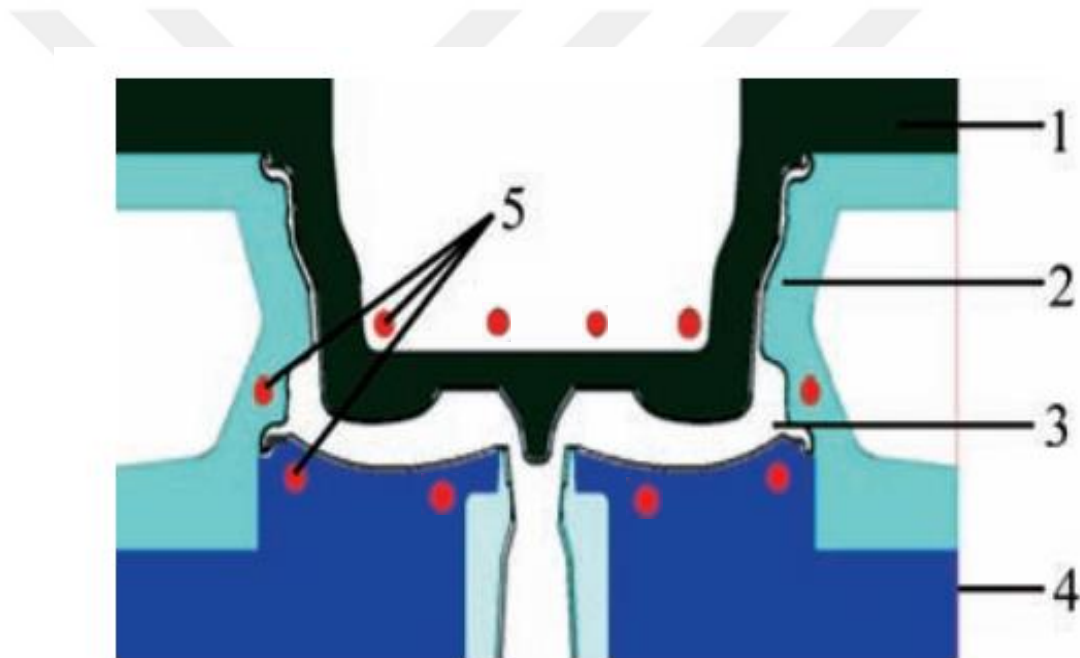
Location of cooling channels 1-top mold 2-side mold 3-casting 4-lower mold 5-cooling system (Guofa, Xiangyu, Kuangfei & Hengzhi, 2009)
